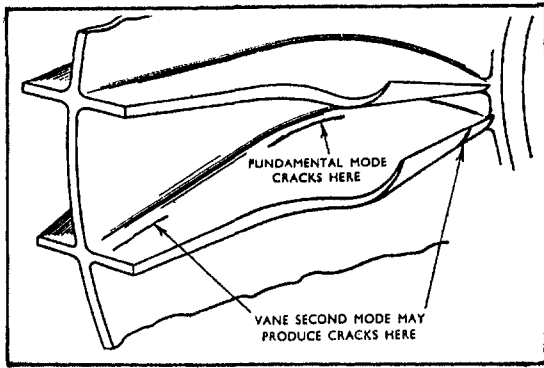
Position of centrifugal impeller vane cracks (Vosey, 1945)
